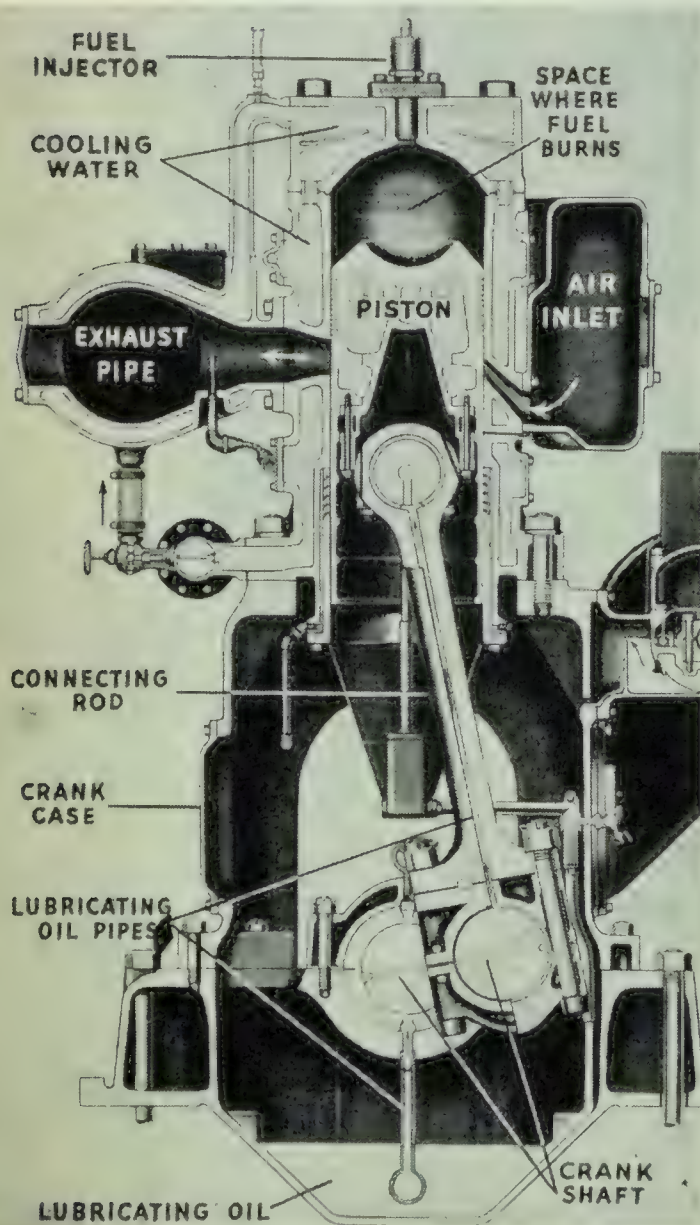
A cross-section view of a Diesel engine. Compare it with Figure 357 to see how much alike the Diesel and the gasoline engines are. In this engine the piston opens and closes the intake and exhaust openings. (Fairbanks-Morse photo)
